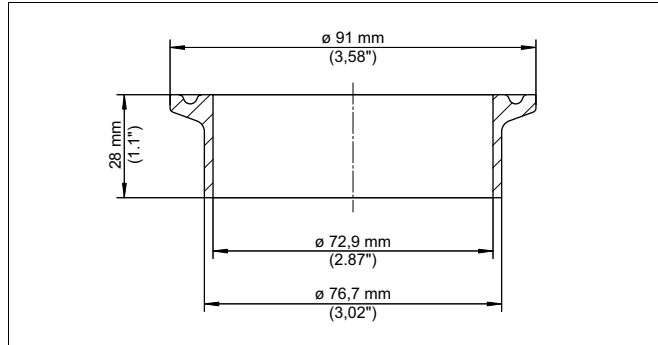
Dimensions welded socket 3" PN16 ( $\varnothing 91 \text{ mm}$ ) DIN 32676, ISO 2852/316L
